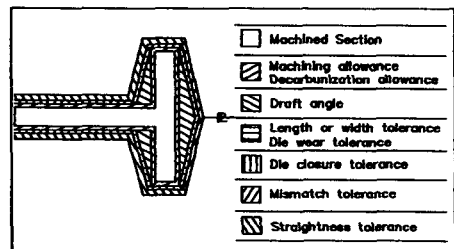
Machined section showing application of all allowances or tolerances
